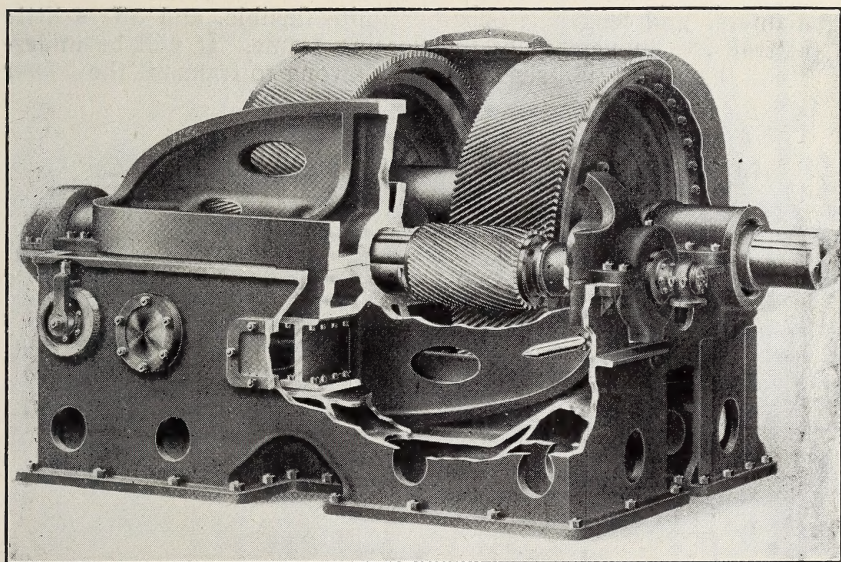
Reduction Gear with Part of Floating Frame broken away to show Construction and Pinion.
